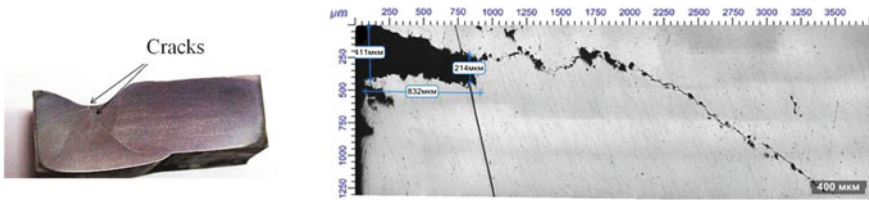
Specimen S-4-1. General view (left) and metal destruction to a depth of 832 microns and intergranular crack of 2.5 mm directed into the depth of the longitudinal weld, $\times 50$ (right)
